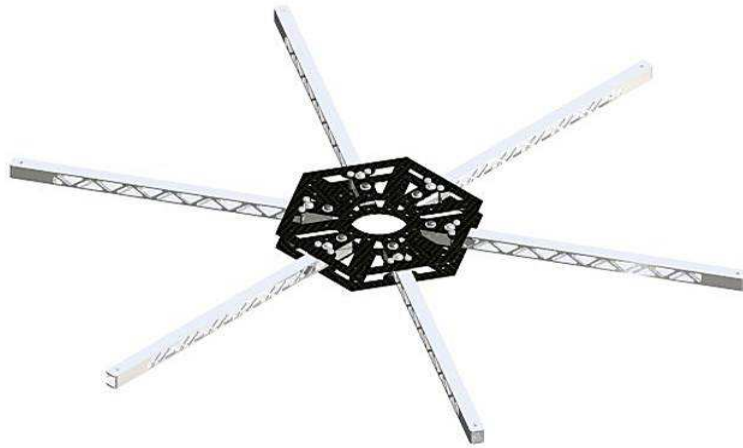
CAD rendering of the central hub assembly with the six motor support arms attached.
